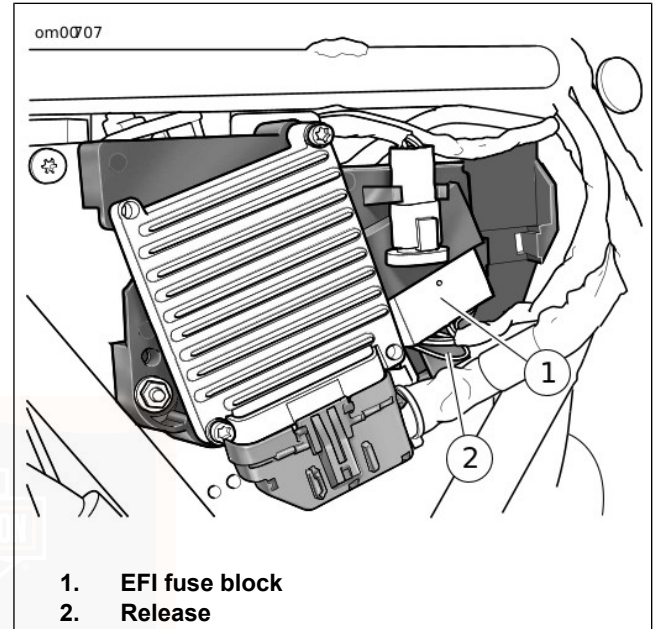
Electrical Bracket Assembly: Right Side Cover for EFI Models
